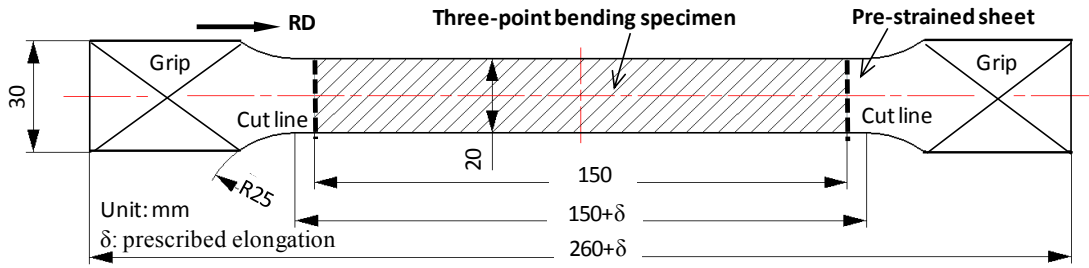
Dimensions of large uniaxial pre-stained sheet and subsequent three-point bending specimen.
